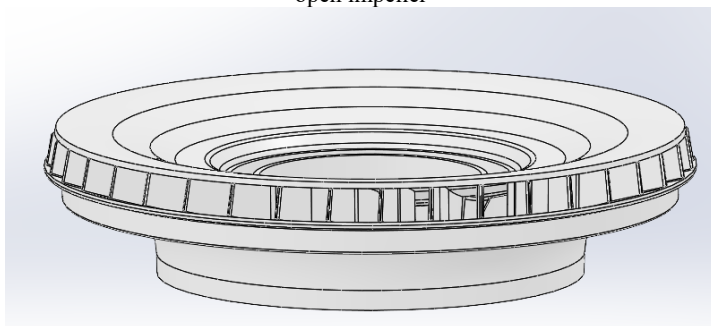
Model of the centrifugal fan impeller with backward-curved blades and a closed impeller
